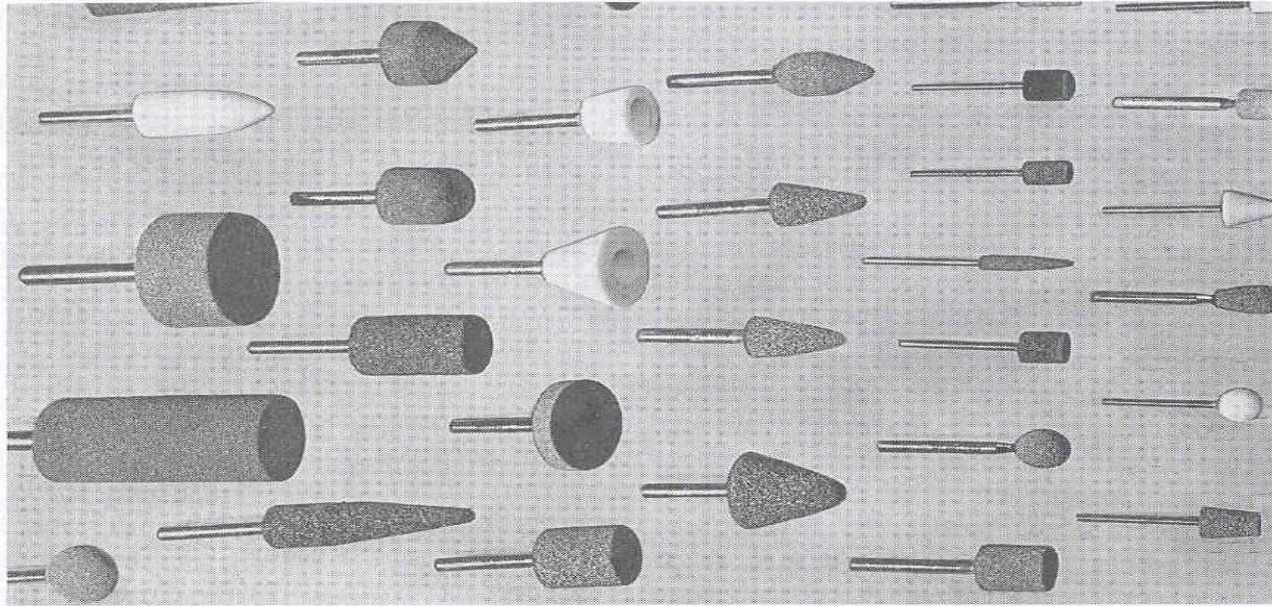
Examples of mounted abrasive wheels and points. (Courtesy of Norton Company.)
